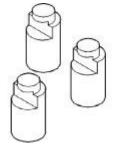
ADAPTER, PINS - 6909A Courtesy of CHRYSLER LLC
